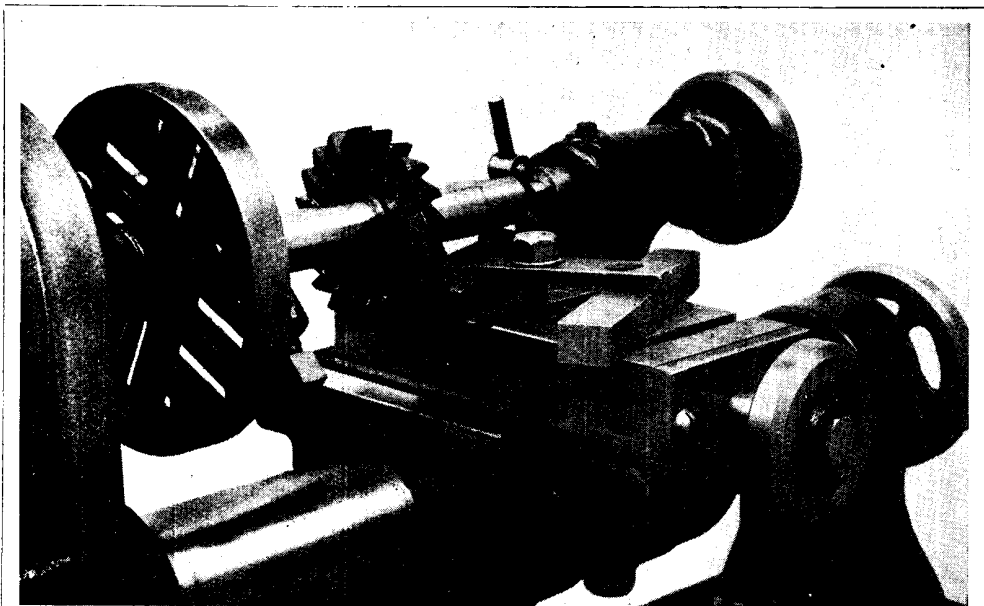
In this round-bed Drummond lathe is a milling cutter ready to operate upon the work in place on the saddle. The milling cutter is on the mandrel, driven between centres by means of the usual lathe carrier rotated by a driving pin attached to the lathe face plate
